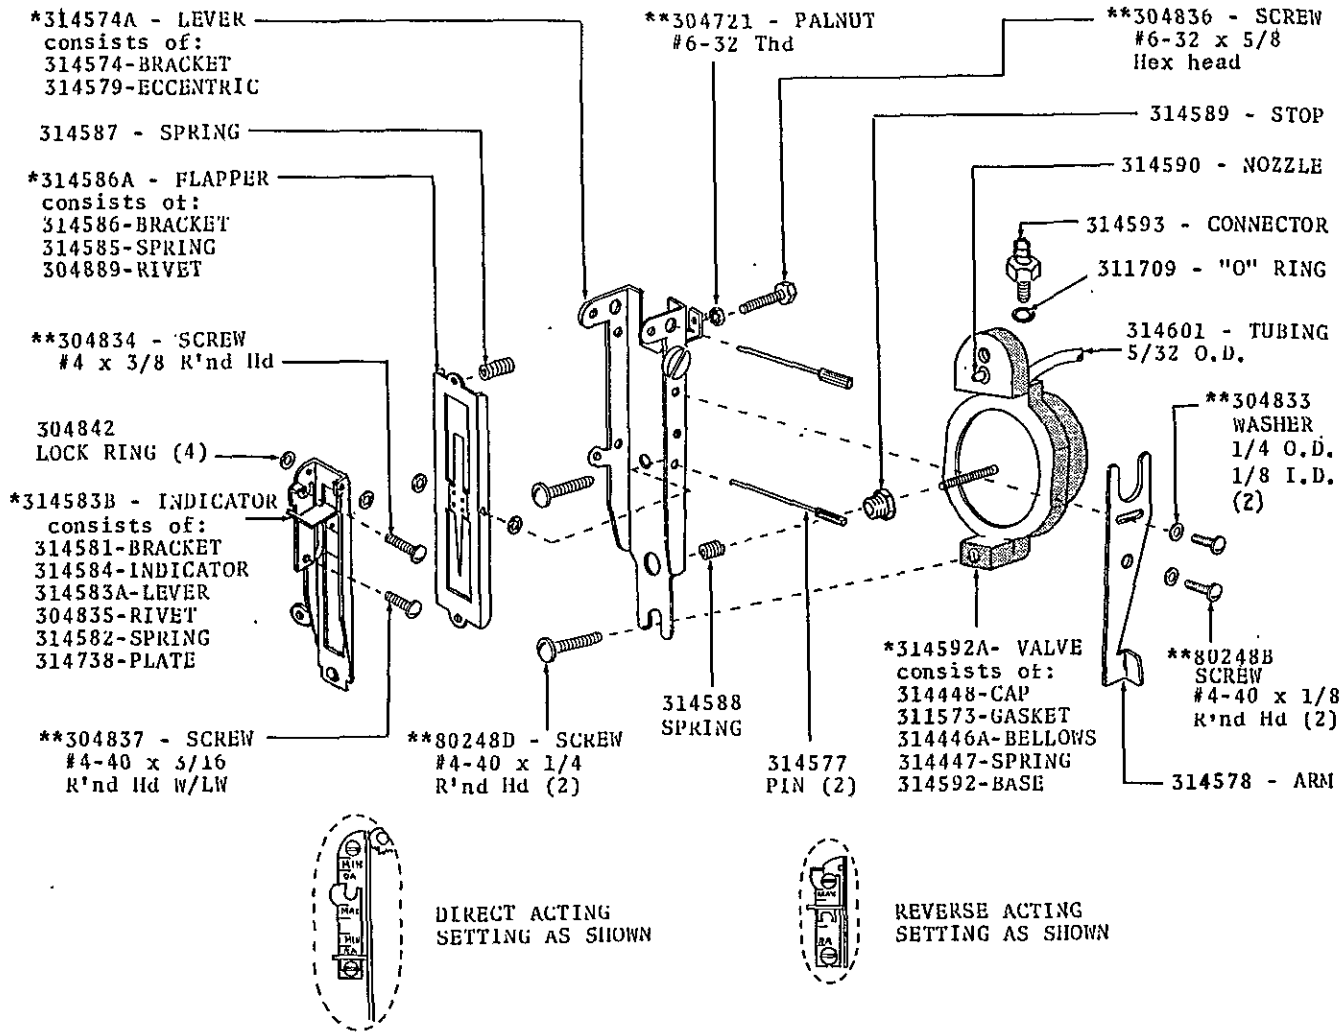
C: \*DIAL & PLATE ASSEMBLY
